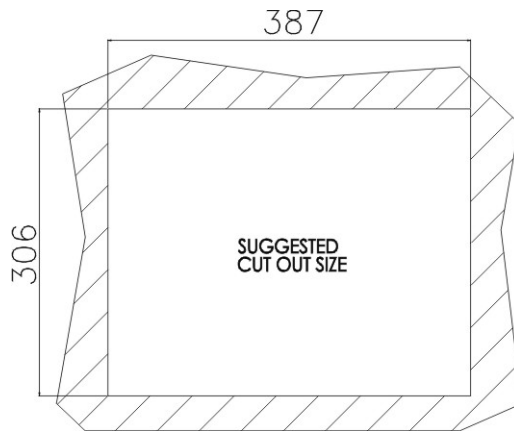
WIDS-515A-H61 Panel Cutout Dimensions
